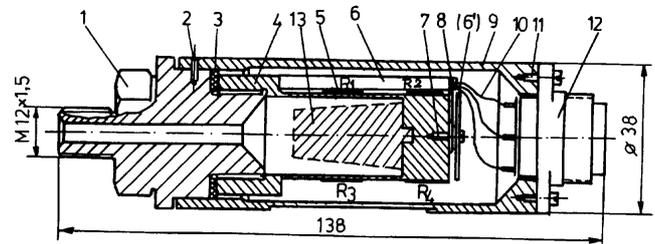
Pressure transducer: 1 - connecting piece; 2, 7, 11 - screws; 3 - gasket; 4 - elastic element; 5 - strain gauge; 6 - connecting plate; 8 - terminal; 9 - case; 10 - wire; 12 - connector.
